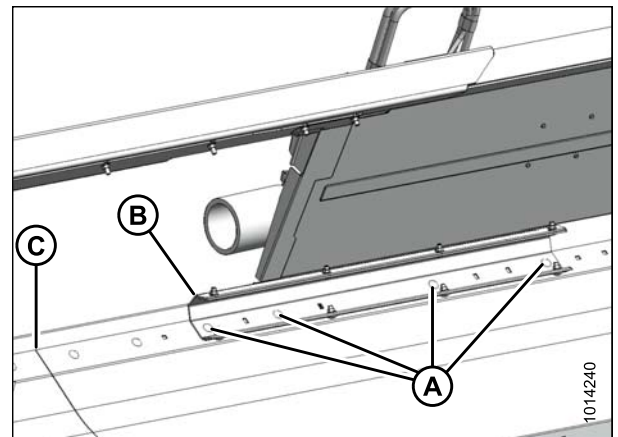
Left Stripper – Narrow Opening (Auger Not Shown for Clarity)
